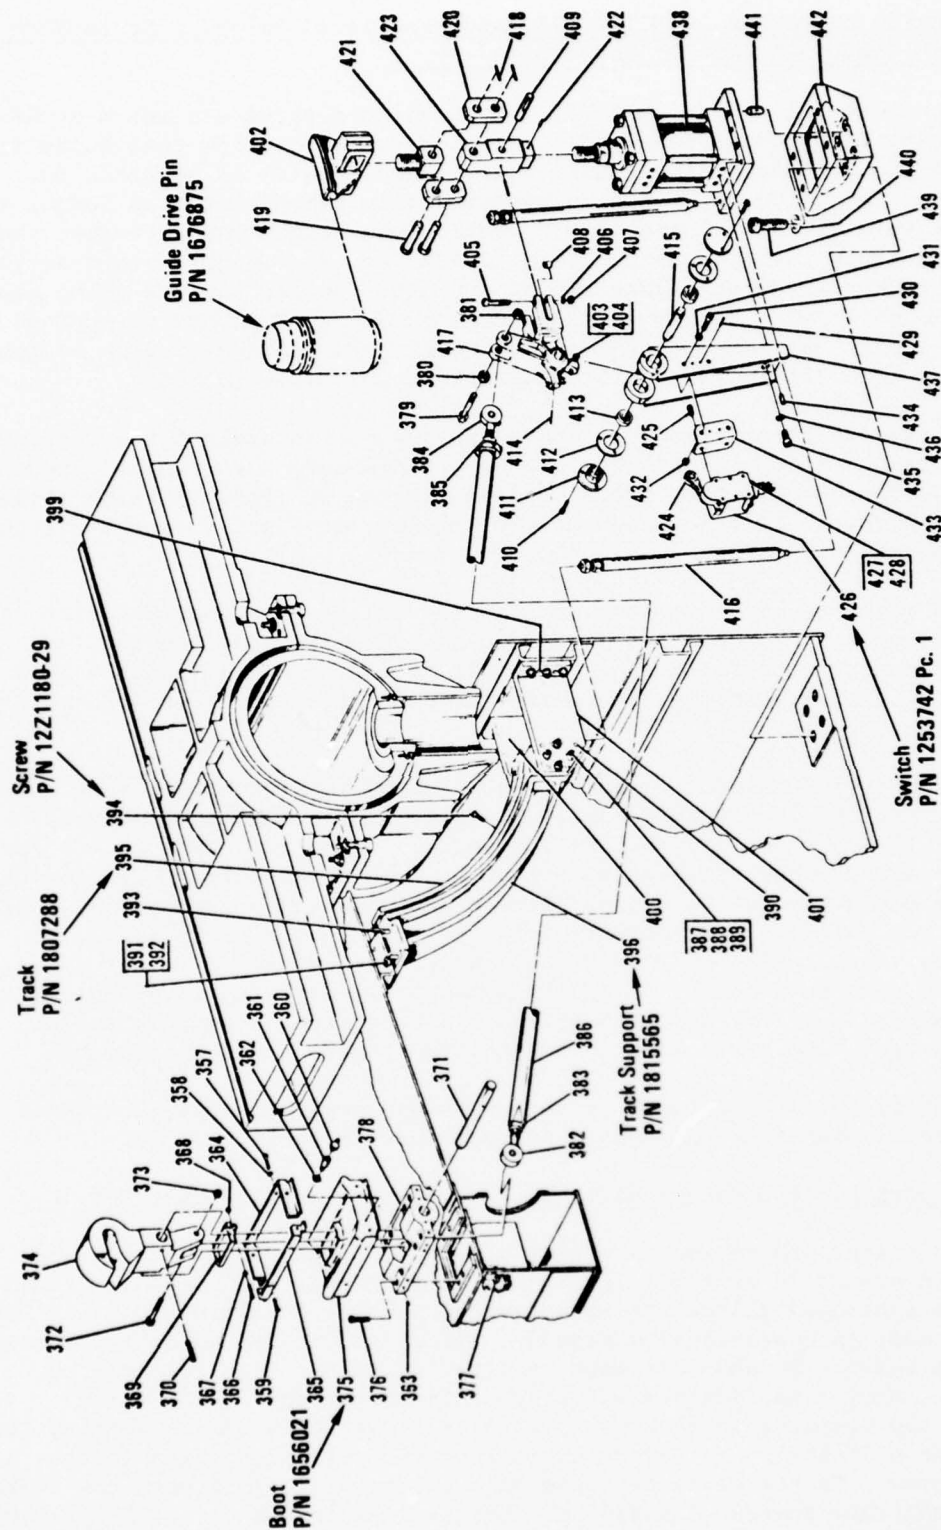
GUIDE DRIVE PIN ASSEMBLY
